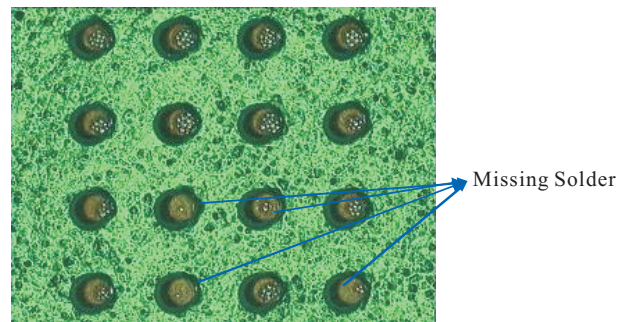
Example of Missing Solder Using 6 mil Aperture Opening
